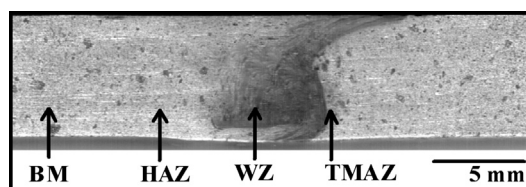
Macrostructure of the friction stir welded AA6061/B₄C AMC.
